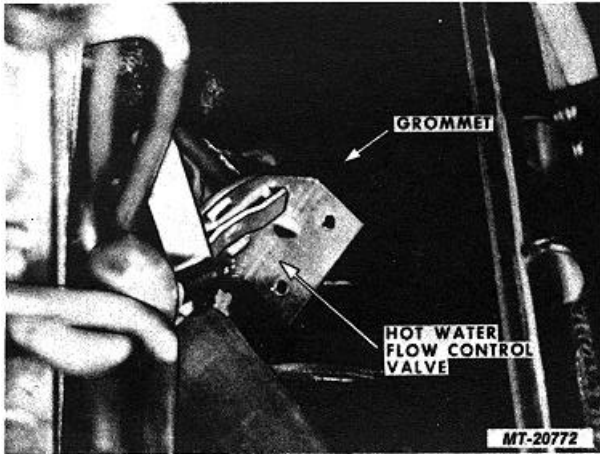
Removing Hot Water Flow Control Valve from Unit Housing
